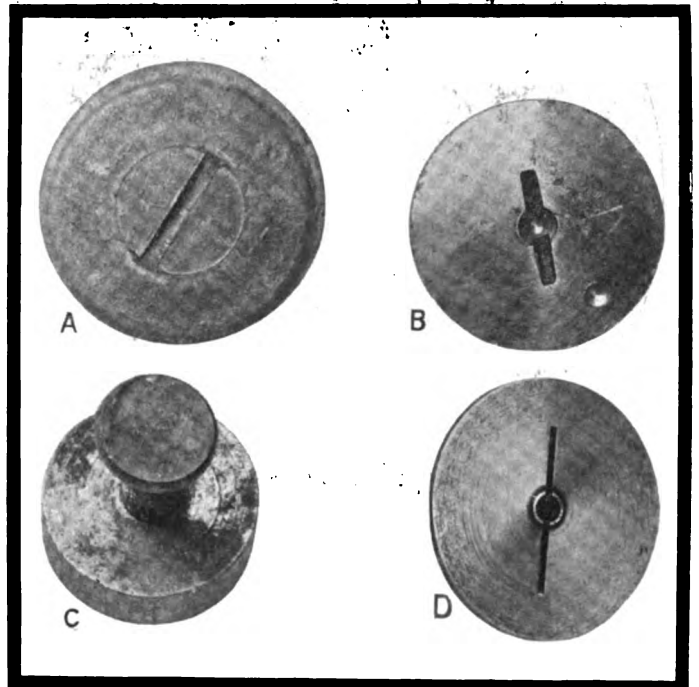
A and B show the rough and finished valve stamped from one piece; C shows the metal before stamping, and D the finished valve
